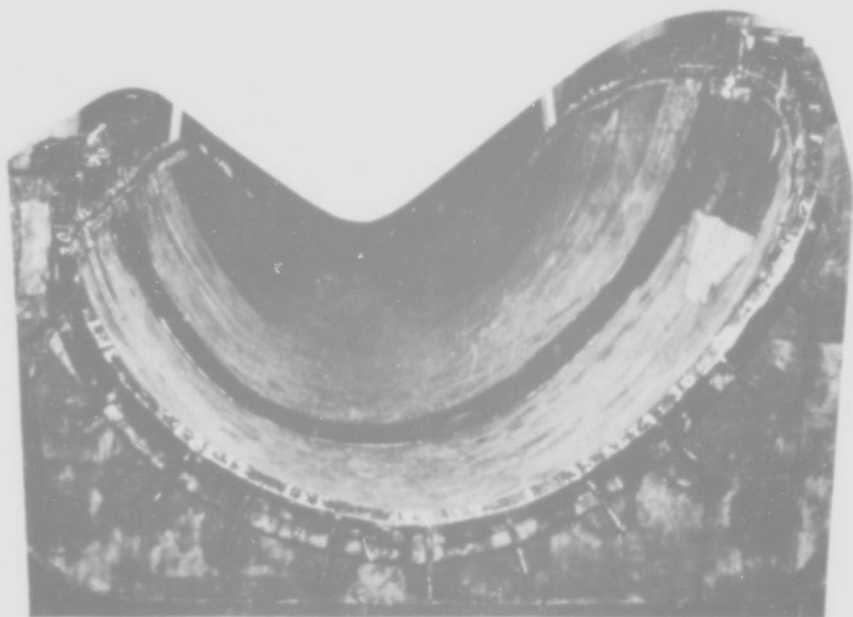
PANEL IN MOLD PRIOR TO REMOVAL
